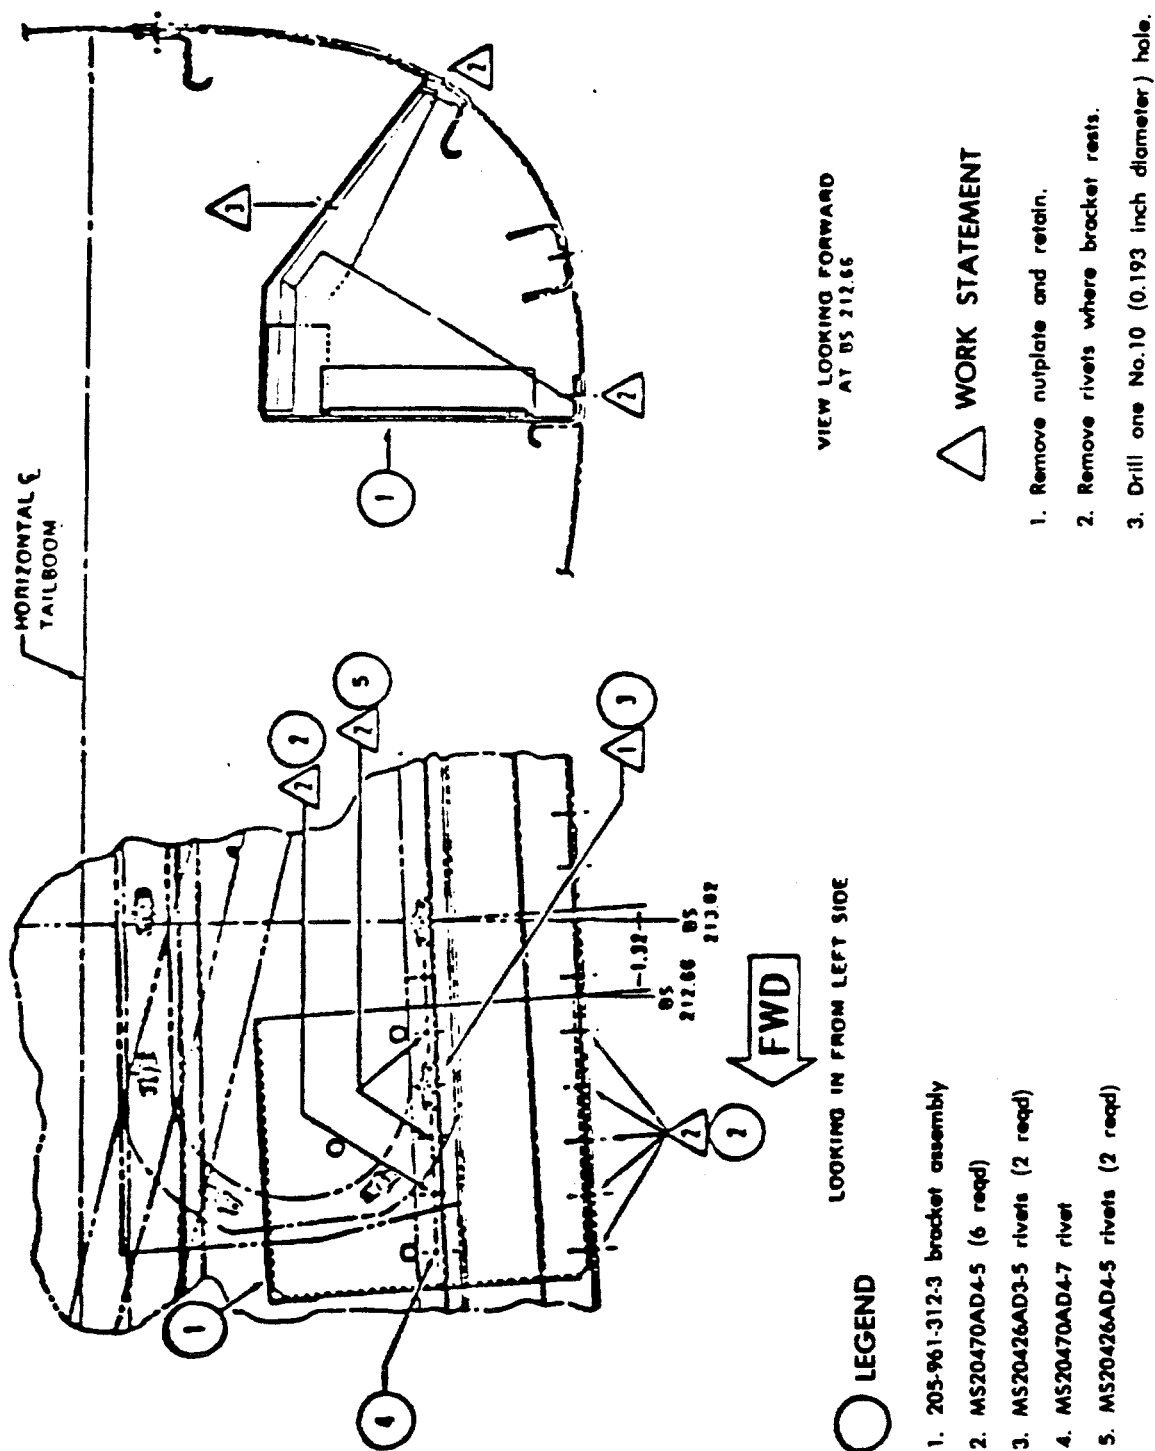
(c). Receiver Mount Bracket Assembly Installation
